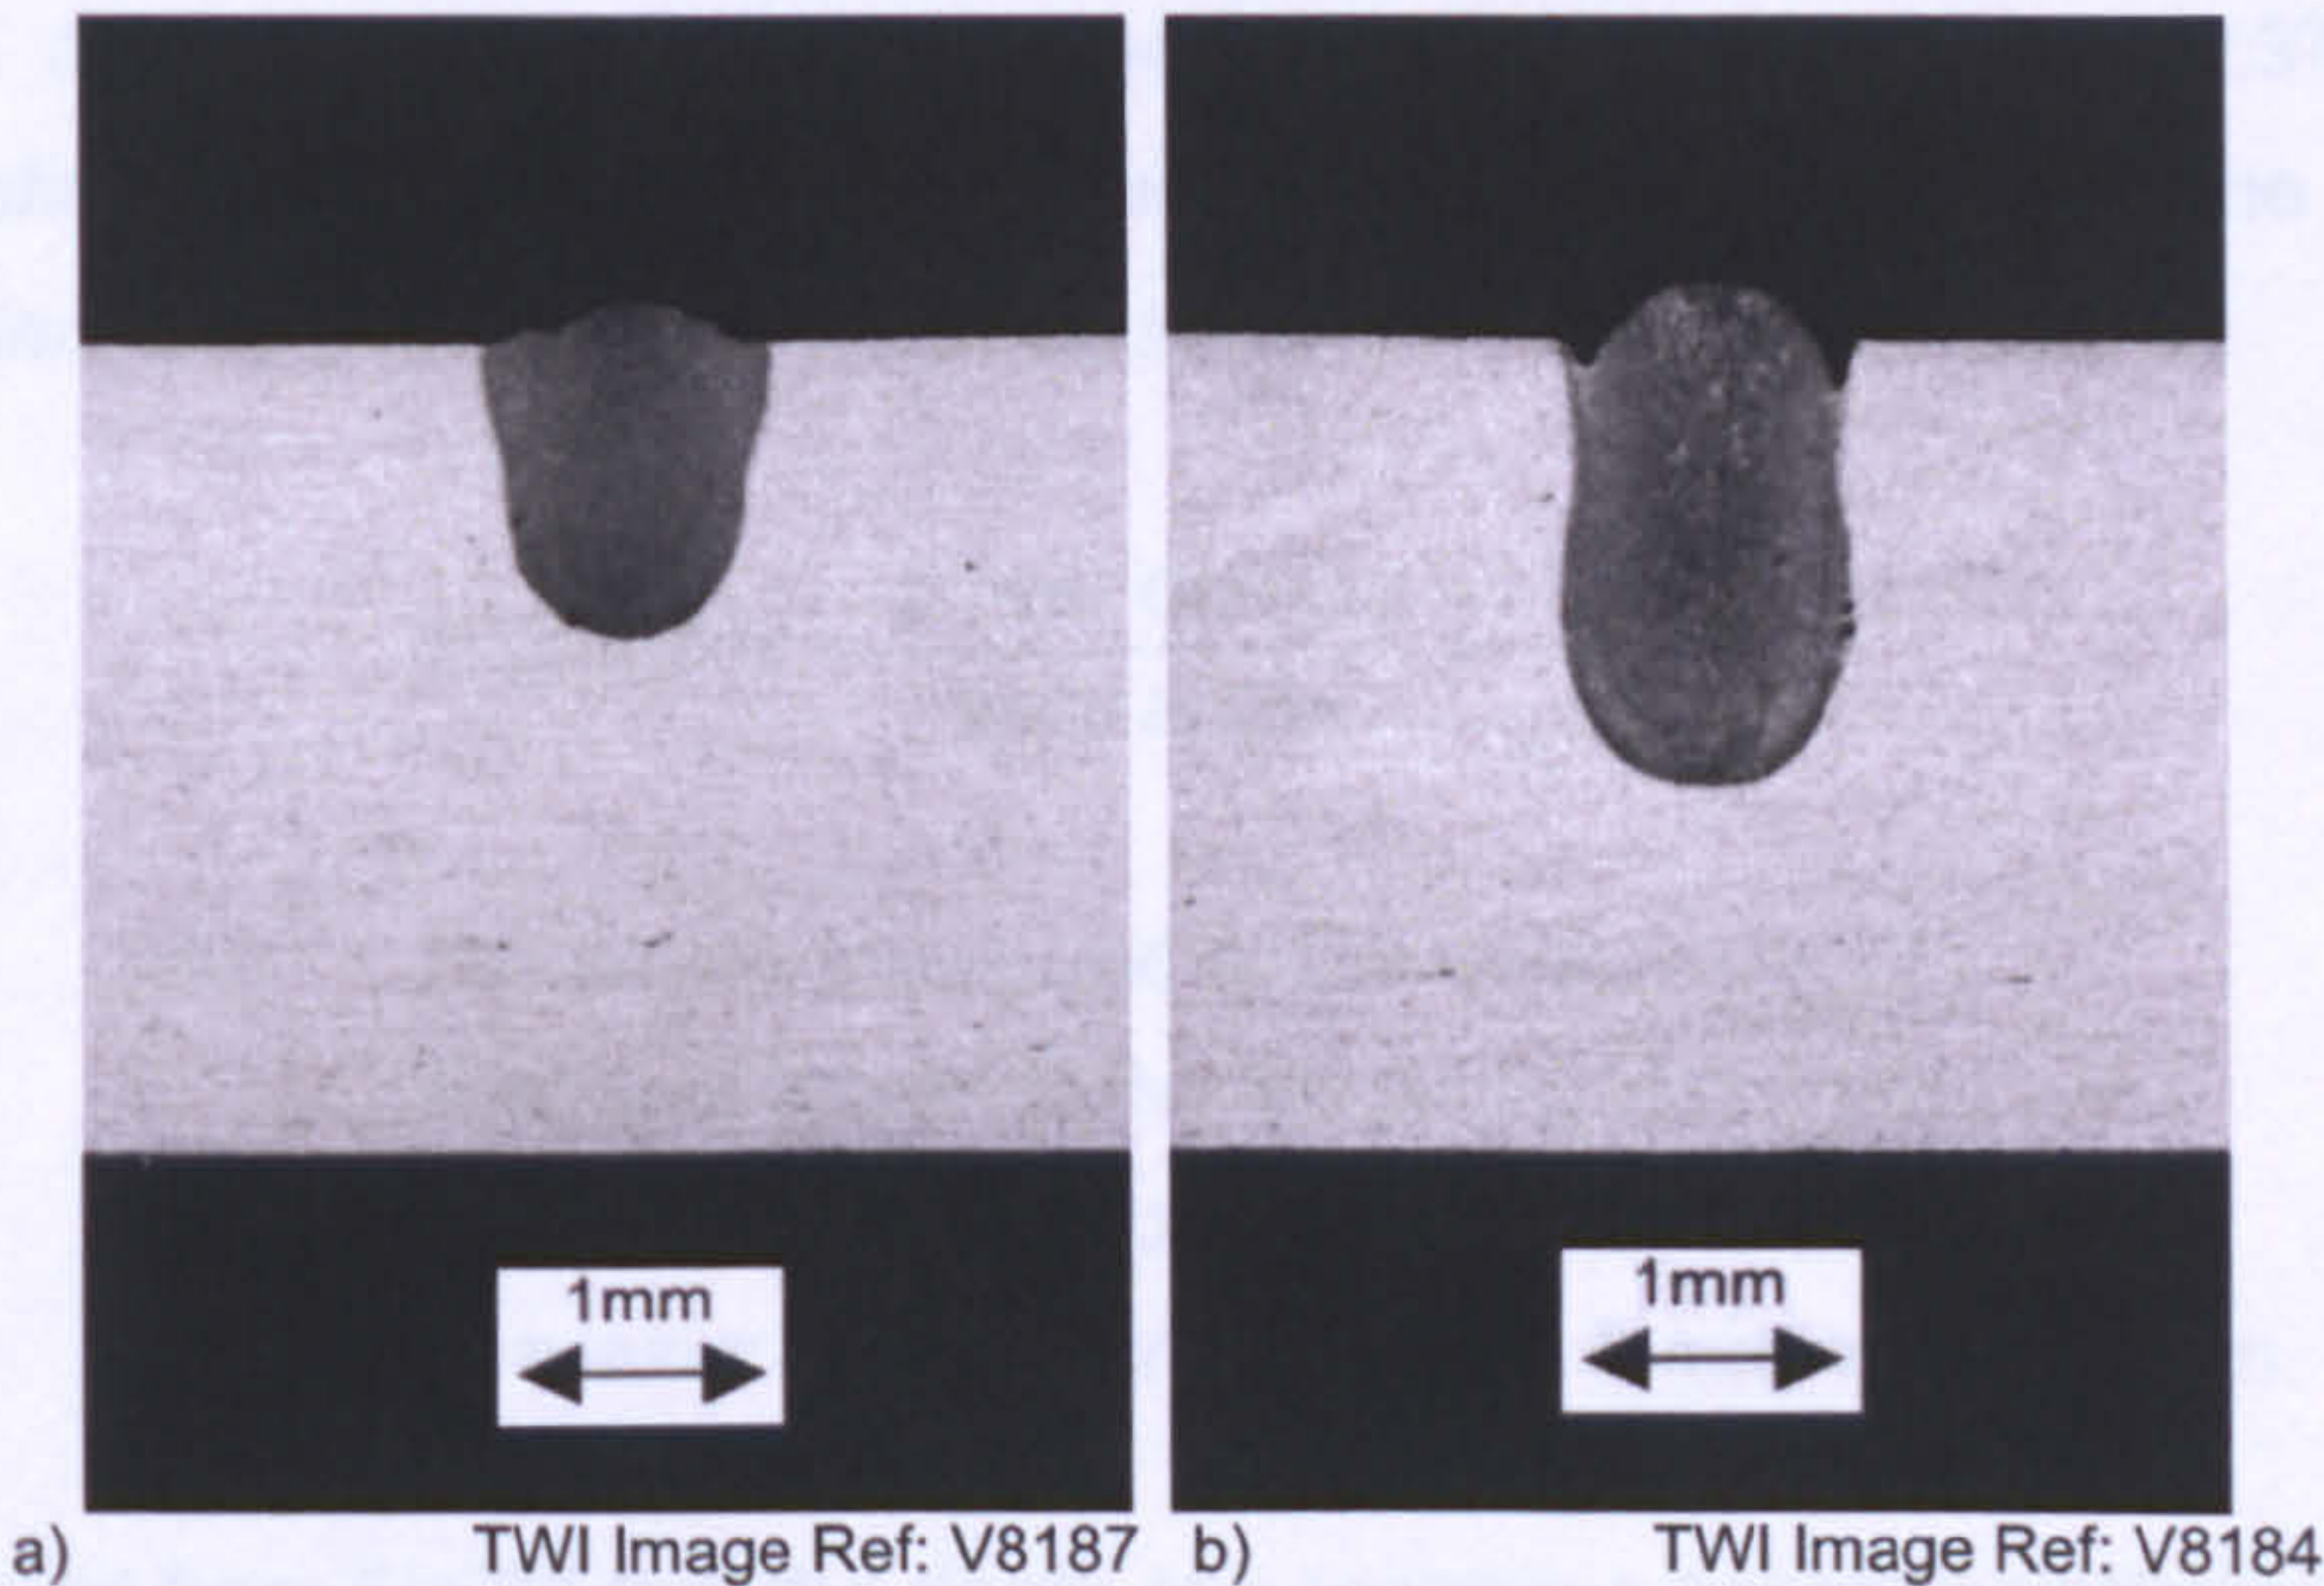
Cross-sections of two welds made in 5083 aluminium alloy using 4kW of laser power focused in a laser spot of 0.4mm in diameter at a welding speed of 15m/min, using a laser with BPP of 23mm.mrad (a) and 4 mm.mrad (b)
